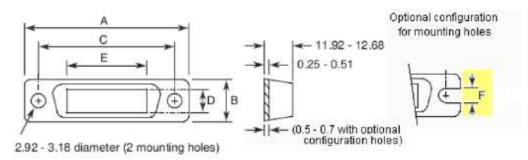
(b) - DUST CAPS (All dimensions in millimetres)
